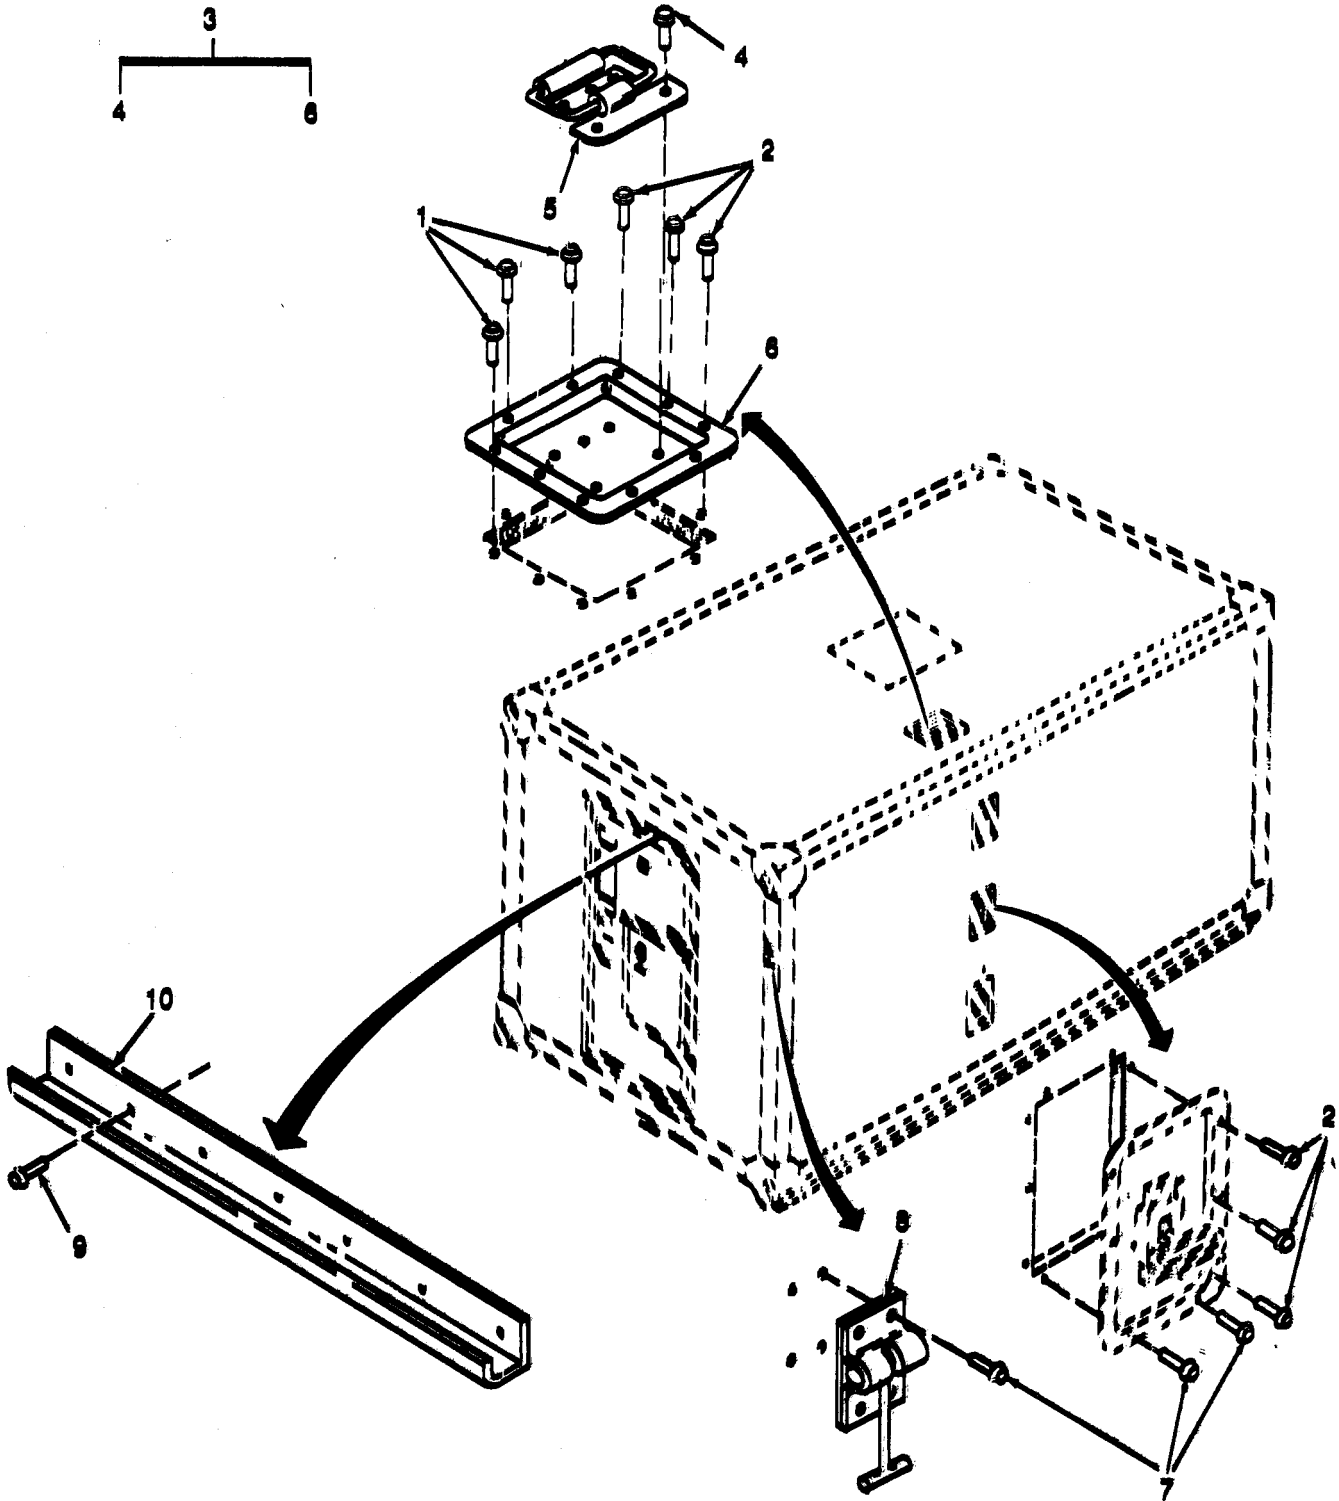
Shelter, Electrical Equipment S-280C/G (Sheet 1 of 3)
